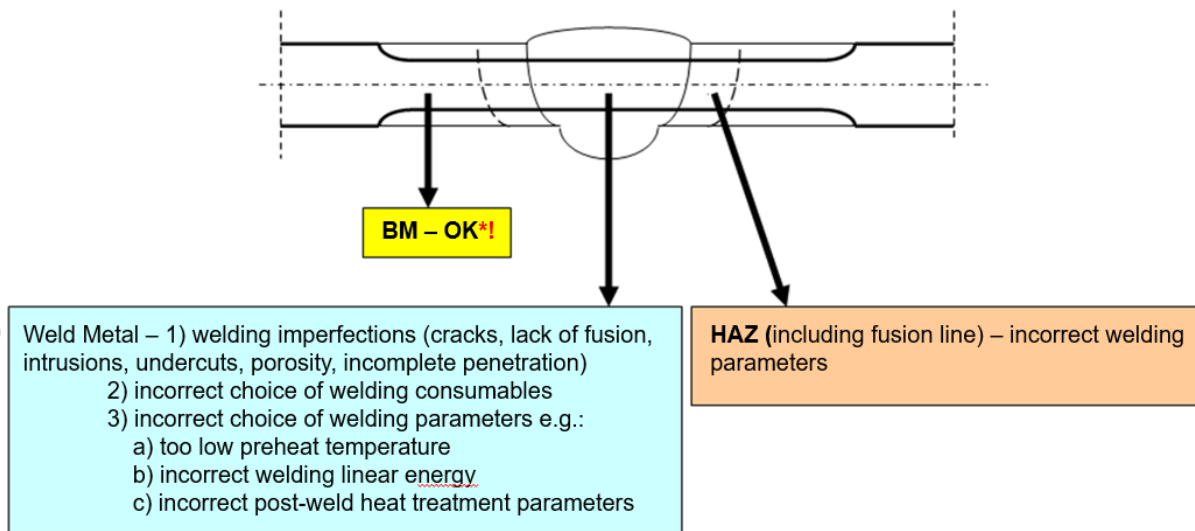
Diagram of the joint in test specimen. Possible causes of fracture in weld metal or HAZ.
